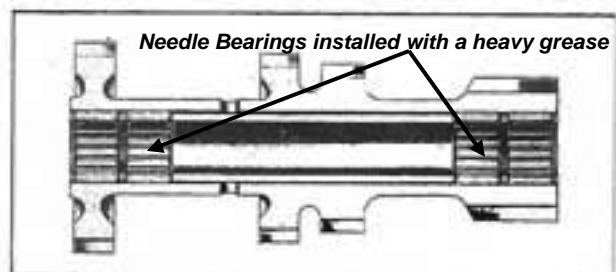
Installing Second Speed Gear Bearing Using 2-5764
